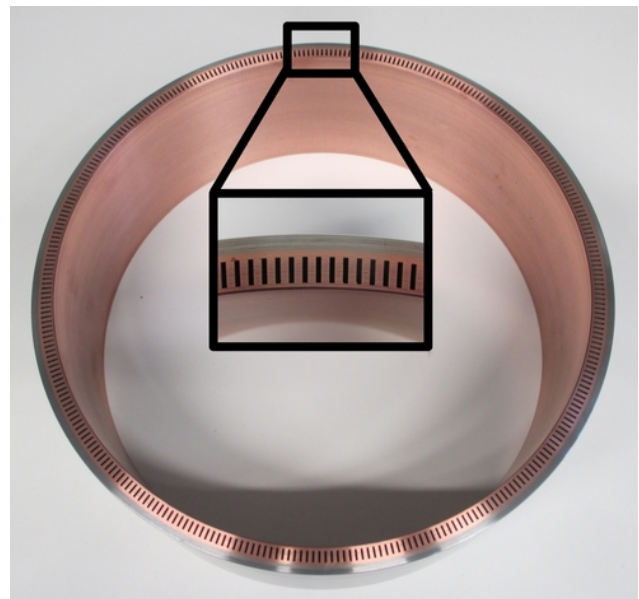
High aspect ratio coolant channel demonstrator piece, with rectangular coolant channels 5x1mm on a part with diameter 280mm.
